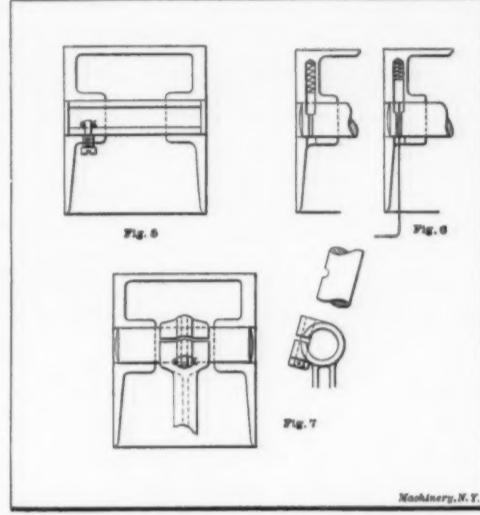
Hollow pin held by Projecting reduced end of set-screw. Fig. 6.—Spring-pin method of holding wrist-pin. Fig. 7.—Pin held by screw in end of connecting-rod.
